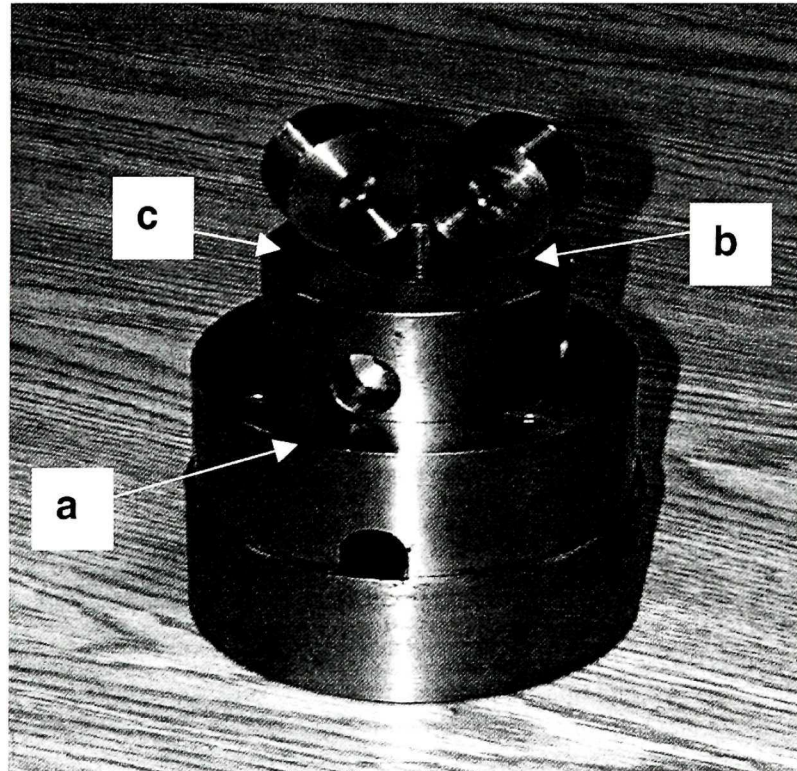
Die set assembly of DWT; (a) die sleeve; (b) lower die, (c) upper die
